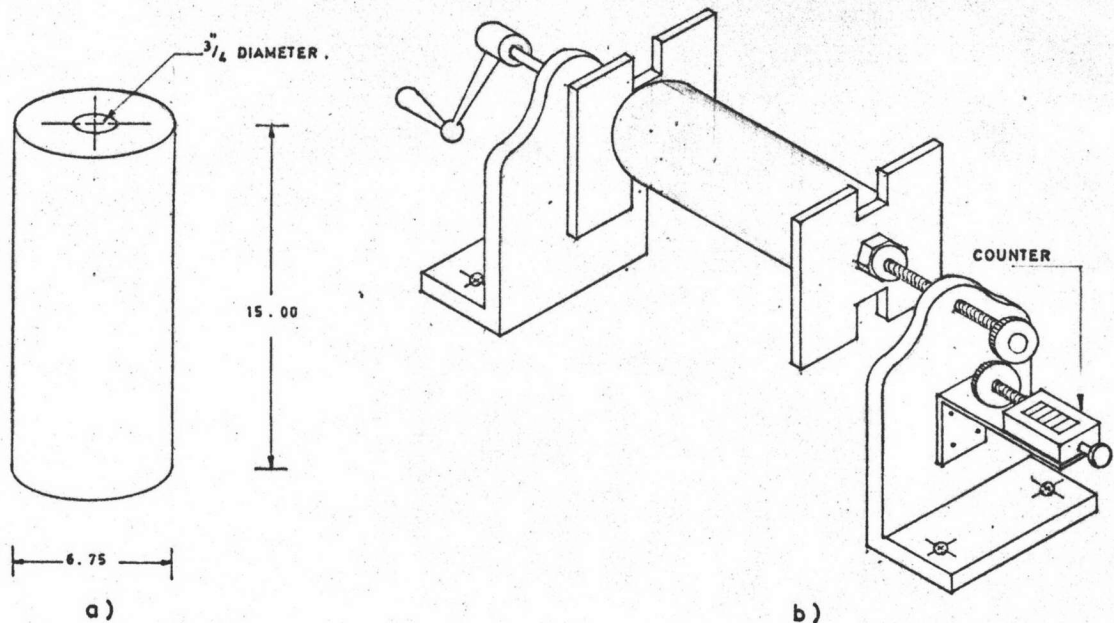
a) WOODEN BOBBIN AND b) COIL WINDING MACHINE .
